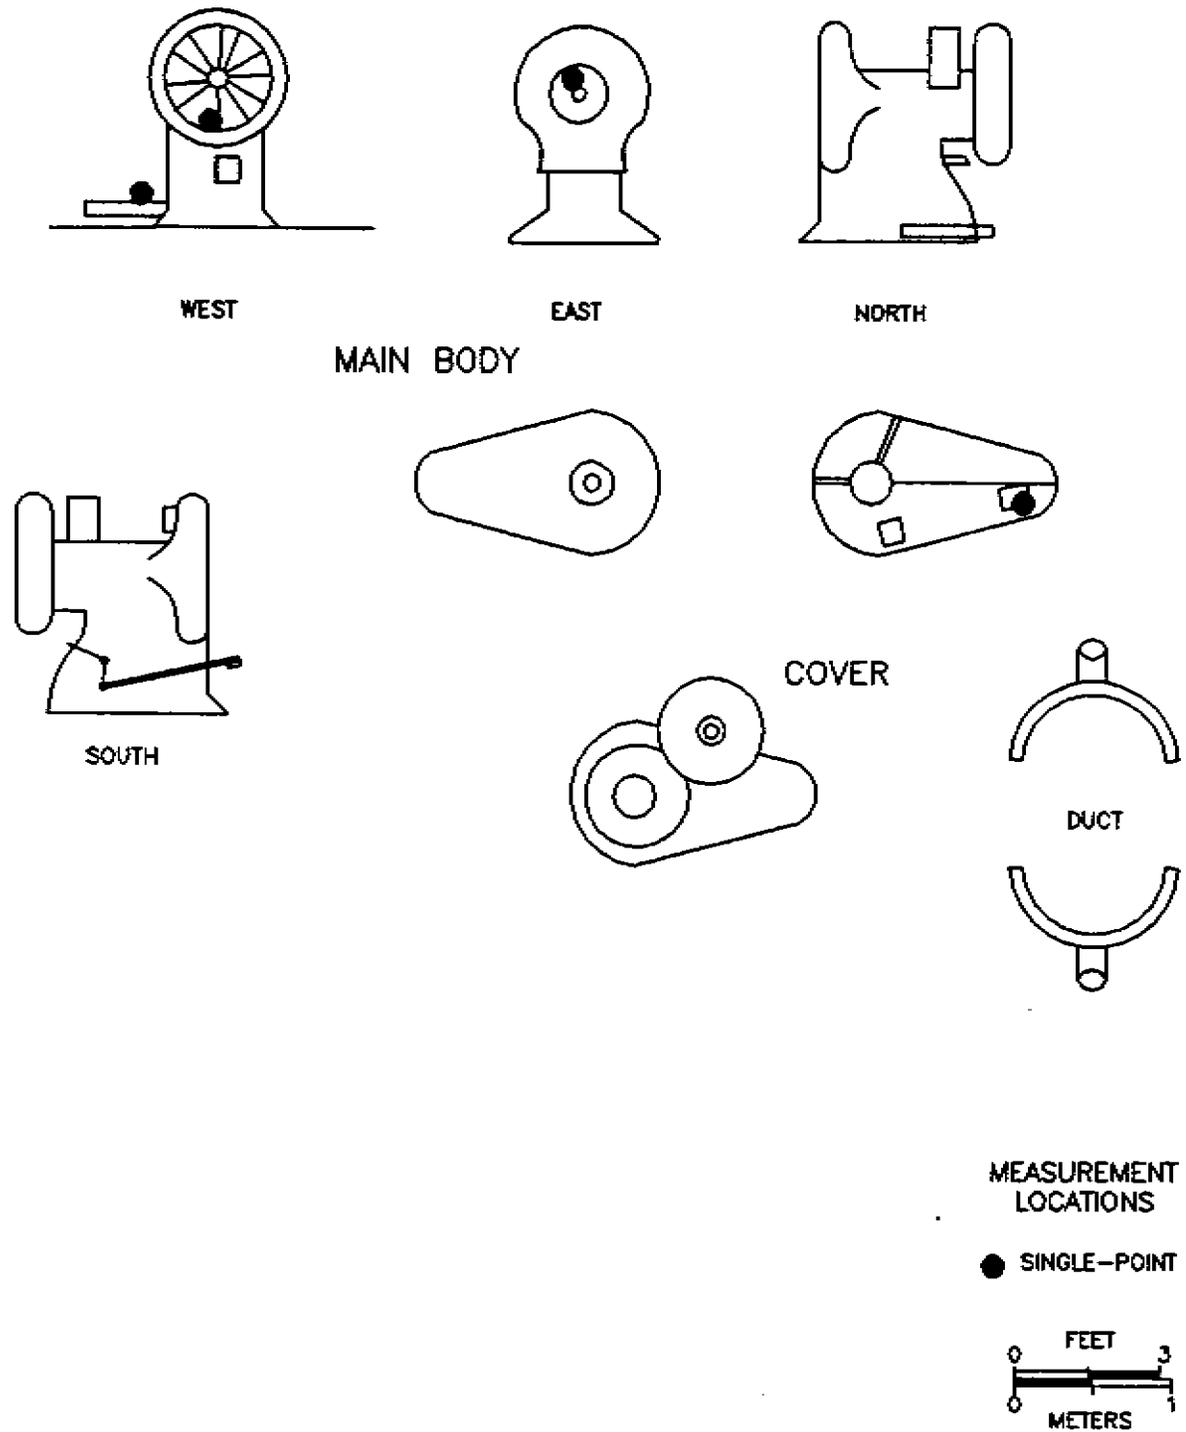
Building 30, Fabrication Room, Extruder #40659, Indicating Measurement Locations
